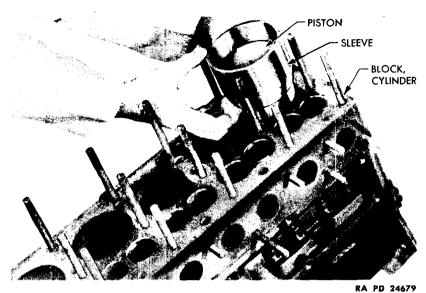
Installing Connecting Rod And Piston In Cylinder
